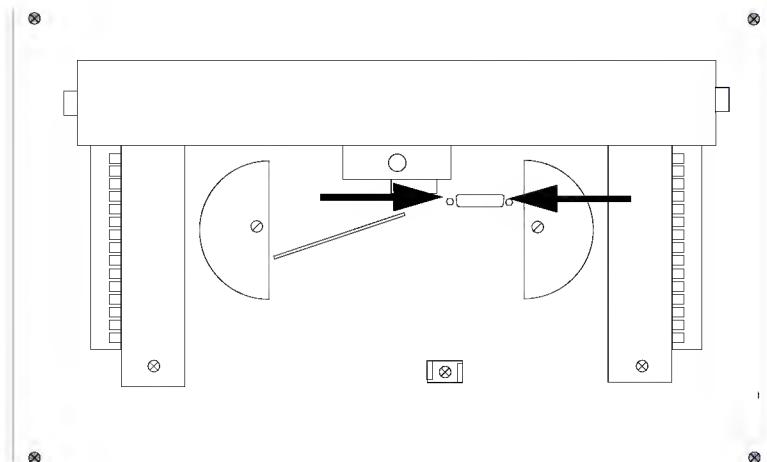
Rear view of the control unit – dismantling the Graphics Controller PCB
